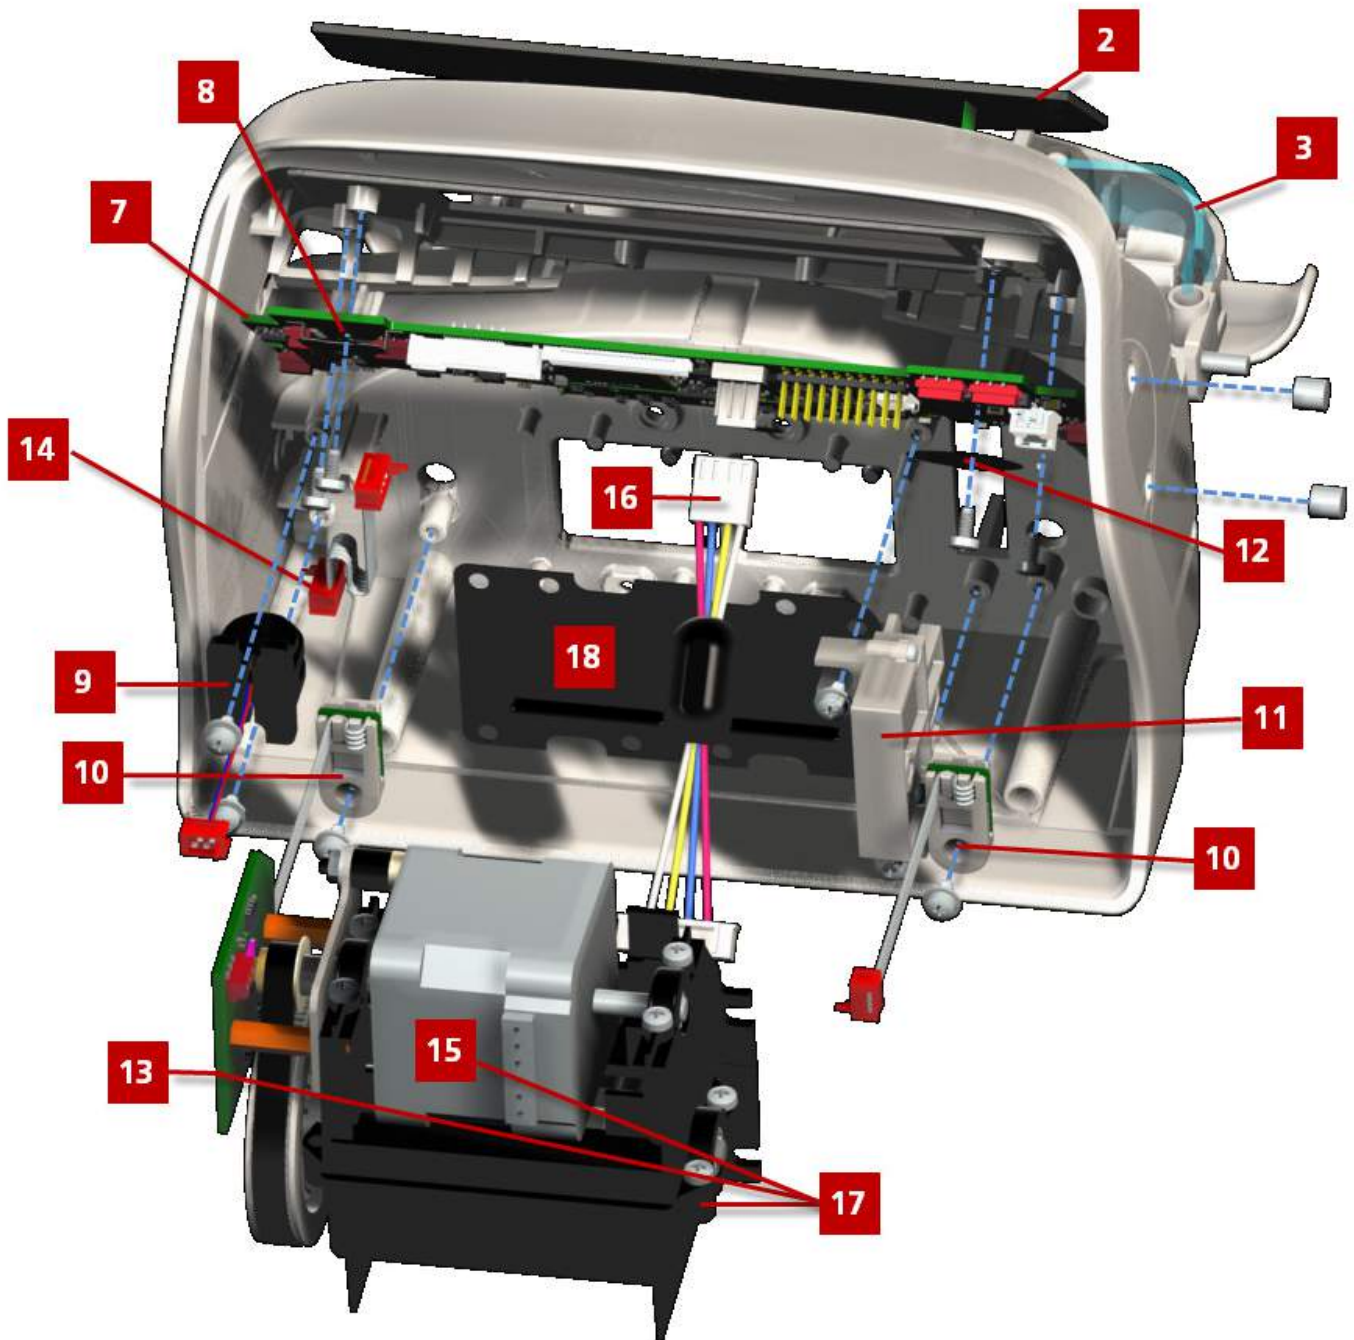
Exploded View ARGUS 71x V - Casing front inside
